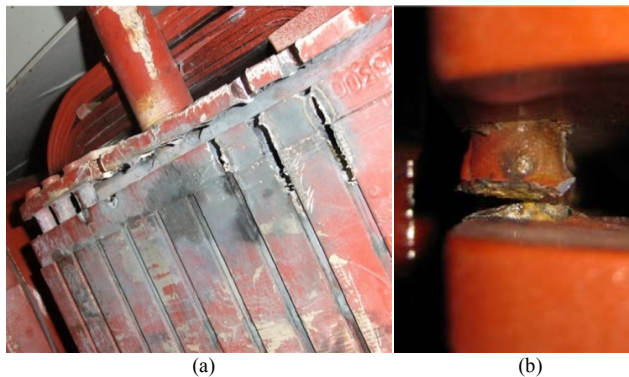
Damper bar failure in 11 kV, 33 MW, 26 pole salient pole synchronous motor; (a) pole surface; (b) broken damper bar
